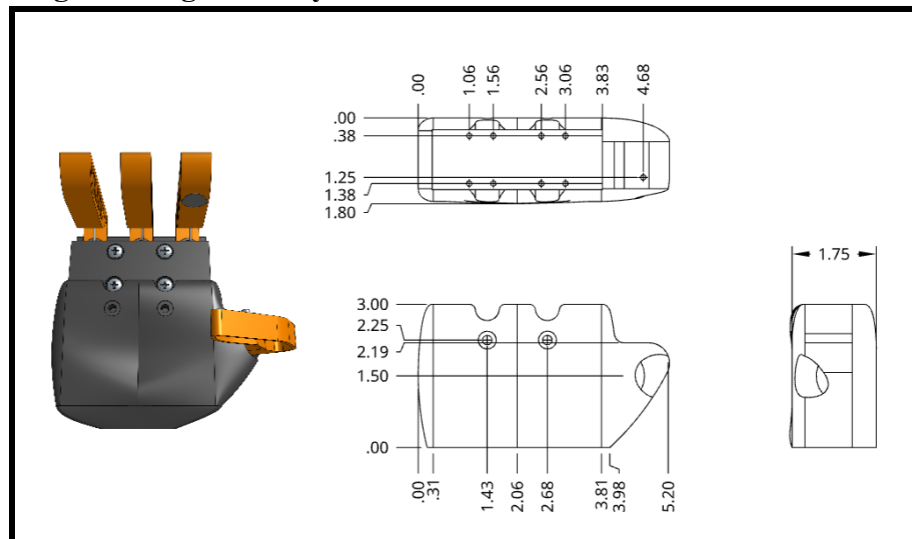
Top, side, front views (clockwise listing) of the outer hand casing along with a front 3D view of the prosthetic assembly are shown. Overall and key dimensions are displayed in inches.
